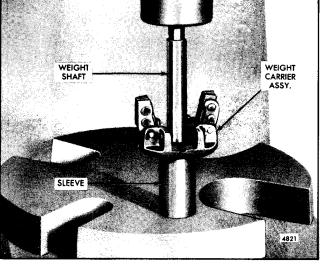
Removing Governor Weight Shaft from Weight Carrier Assembly
